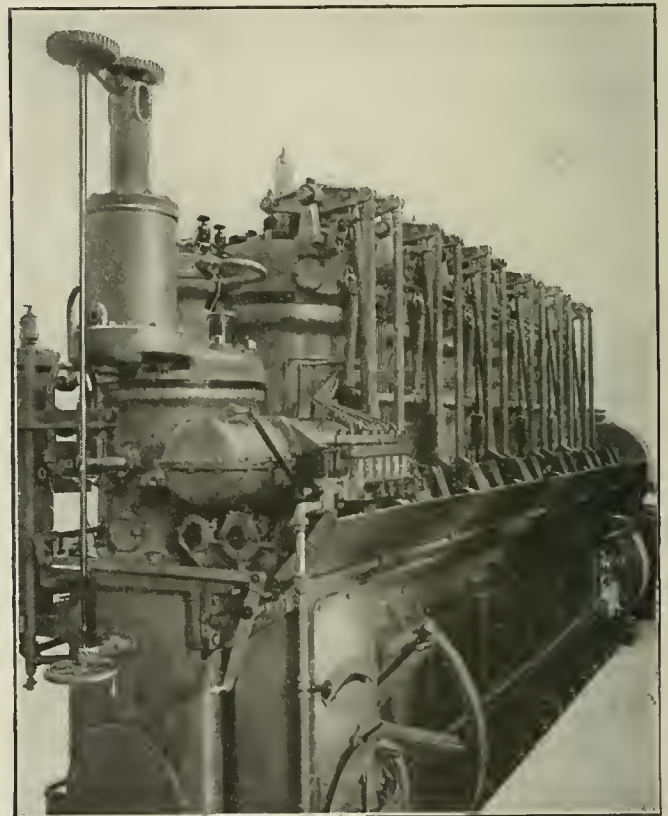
ASSEMBLY OF ENGINE SHOWING VALVE GEAR
